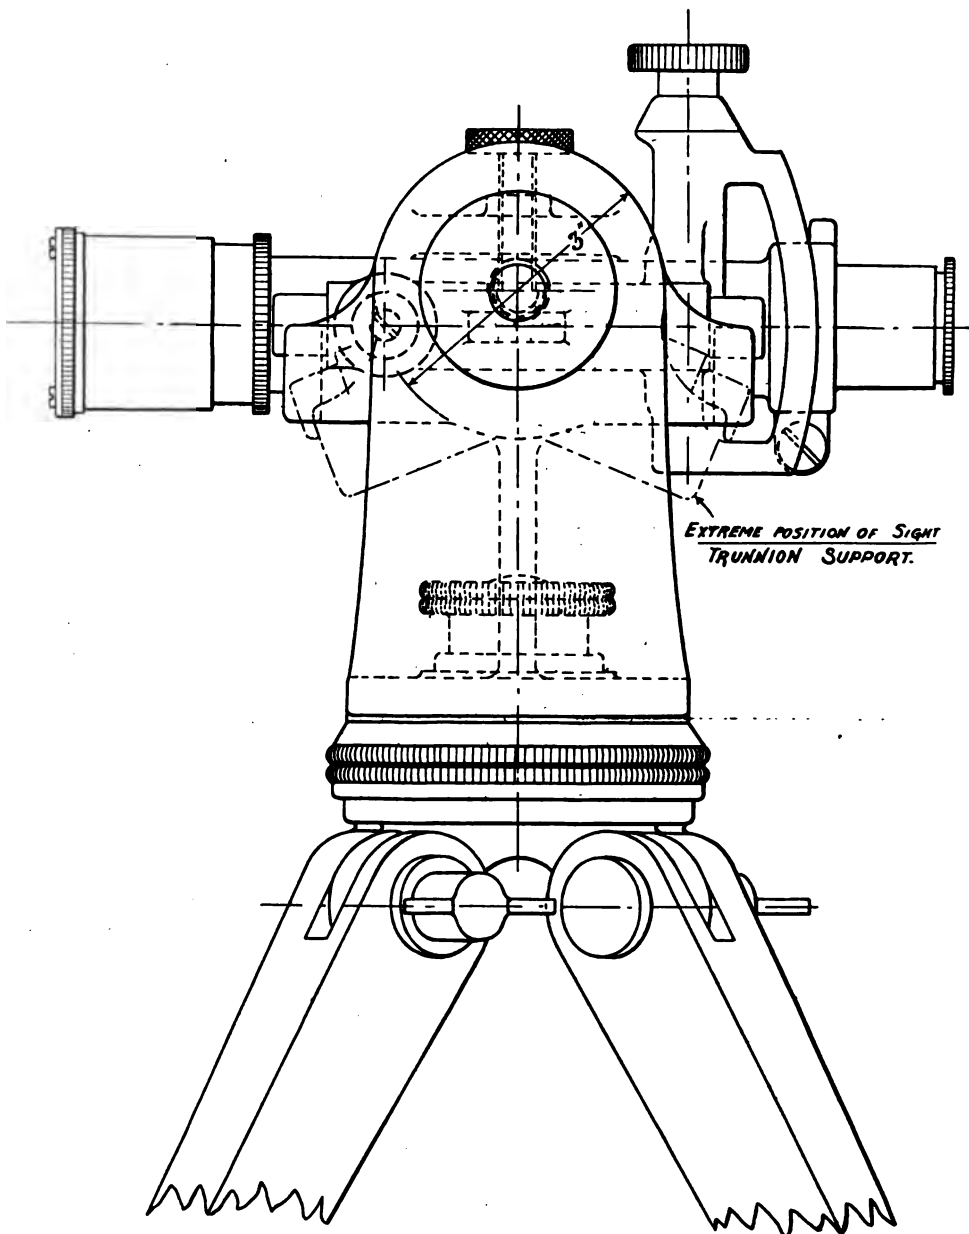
HAGOOD TRIPOD MOUNT FOR TELESCOPIC SIGHTS. — SIDE ELEVATION.
